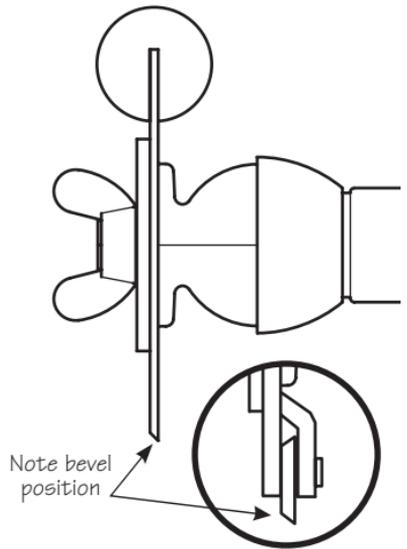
Scraper assembly, steel blade (05K21.01).
